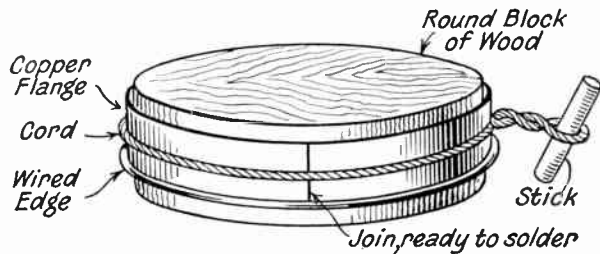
USING A PIECE OF WOOD AS A TEMPLATE ON WHICH TO SHAPE THE FLANGE.
